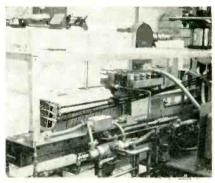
Method of cutting tubing by shearing out a tenth-inch length in two sections. Shearing tool is 0.1 inch thick and just fits between ends of square shearing dies through which tubing passes with snug fit
